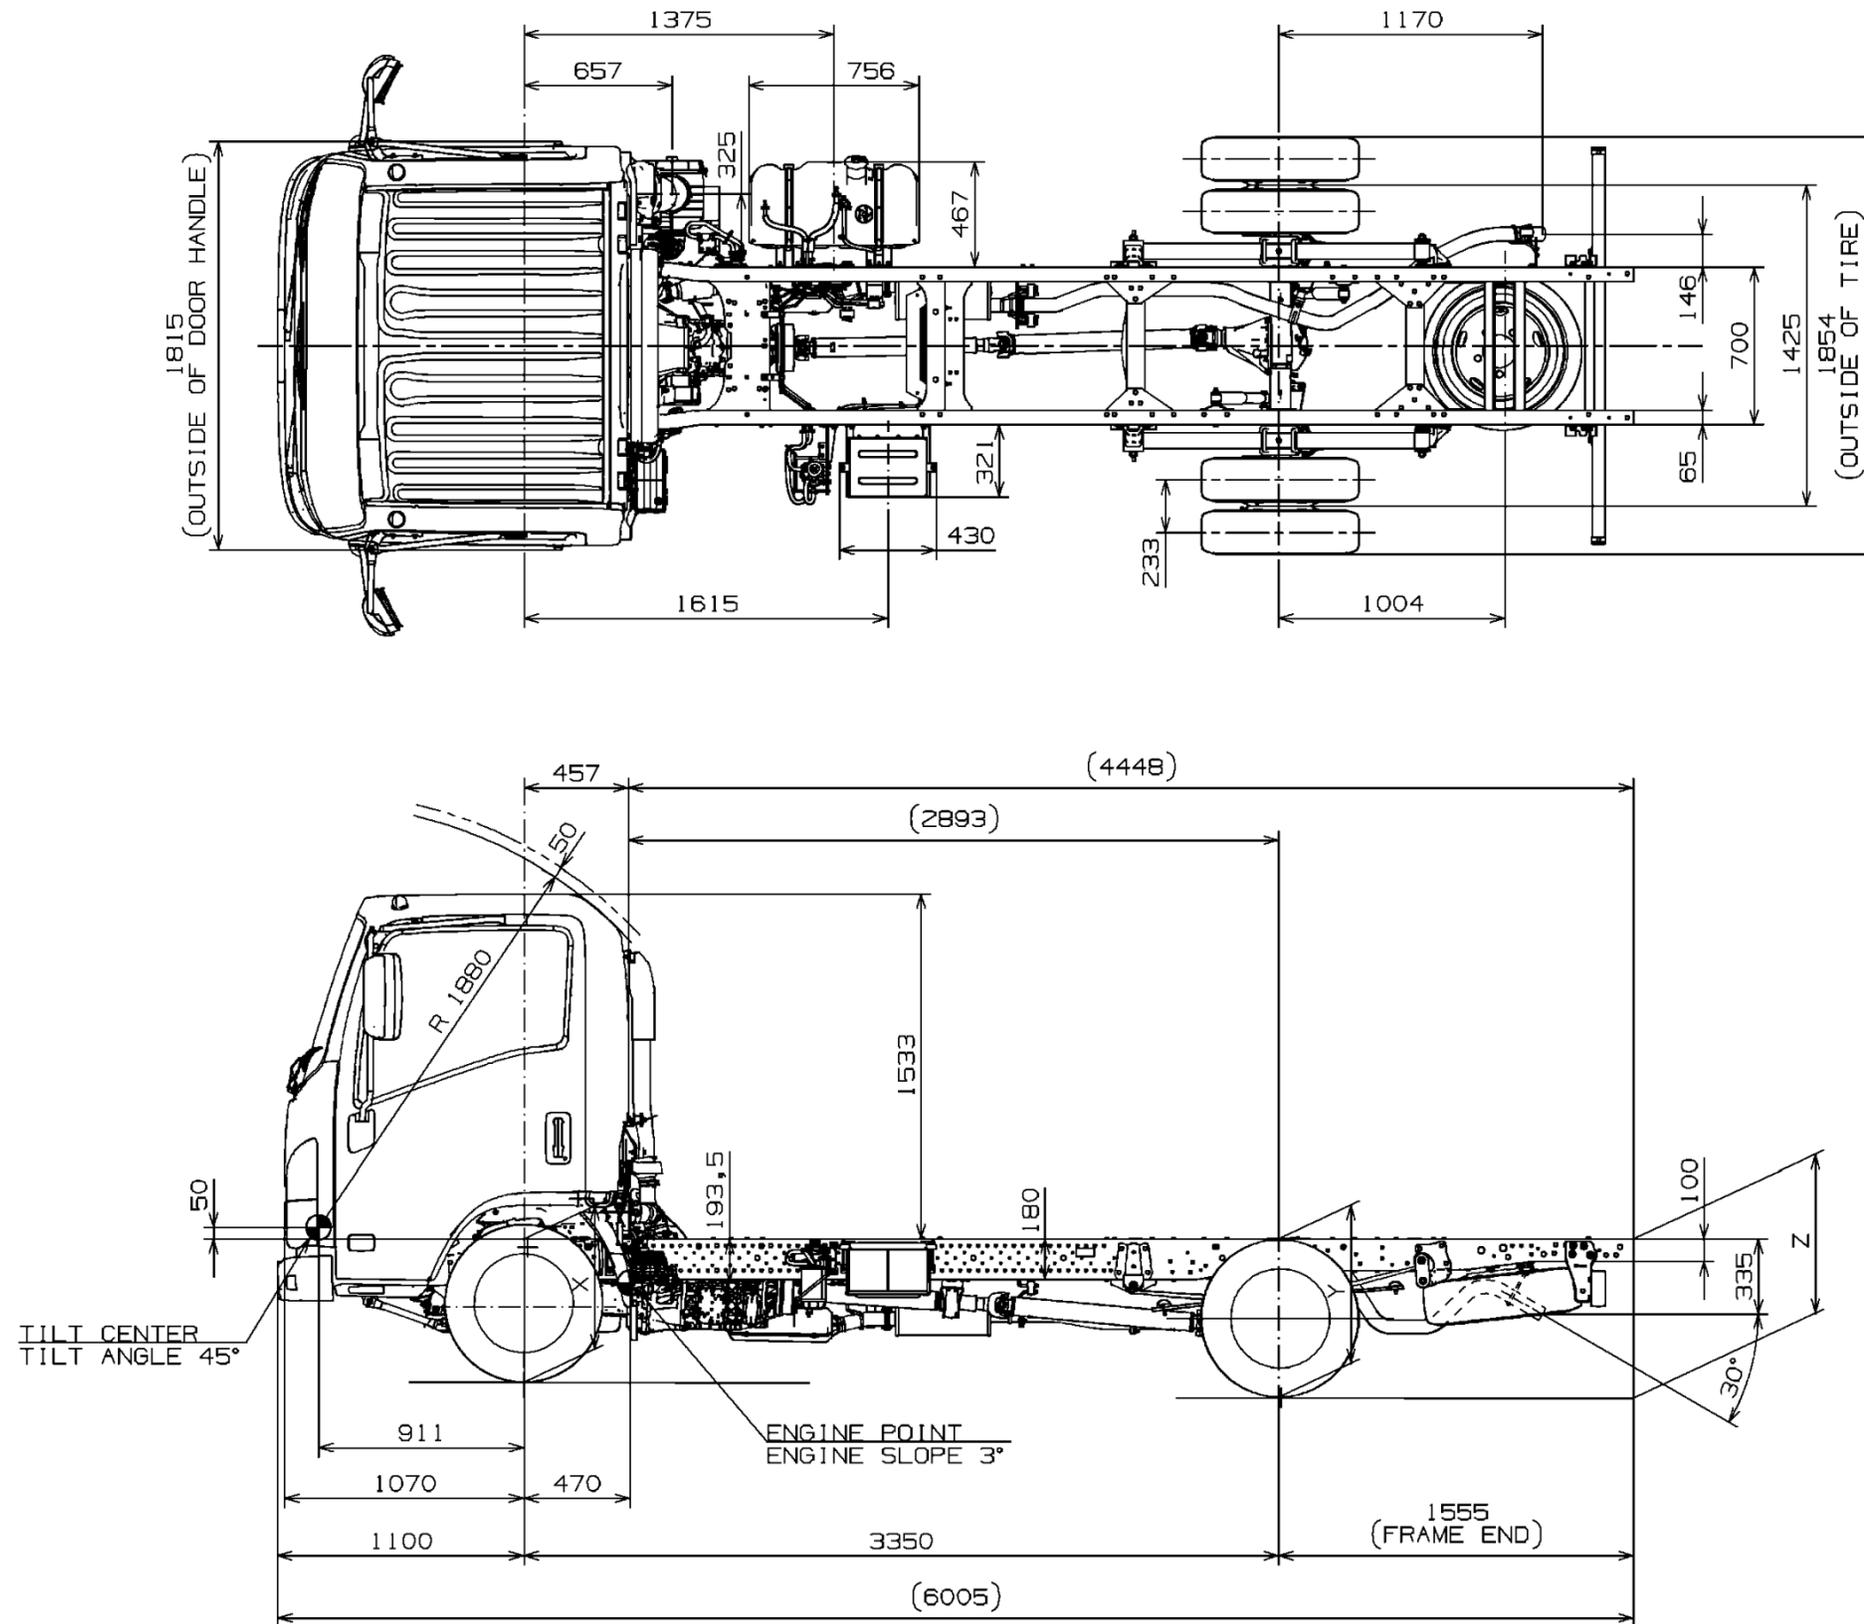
Cab Chassis Drawing NLR85L/U-ED5AYEN
